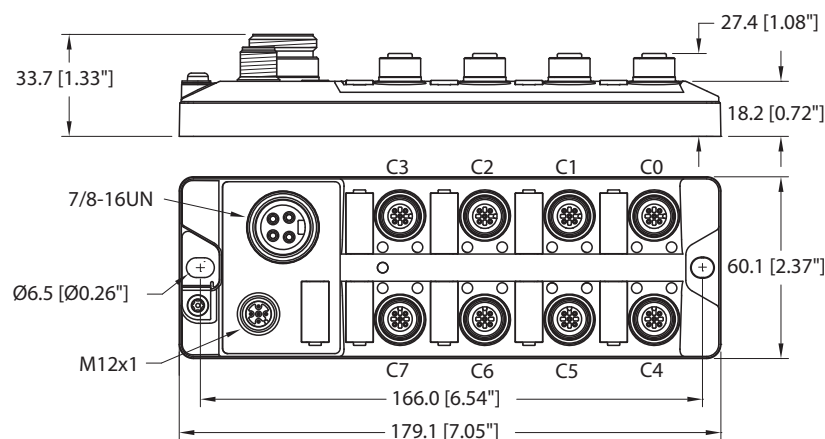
Dimensions TBIL-L4-16DXP-AUX
